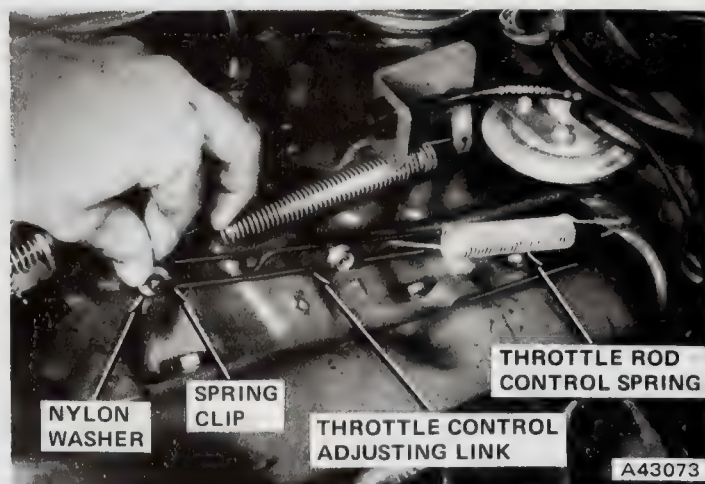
C-31 Installing Nylon Washer and Spring Clip—Eight-Cylinder Engine
